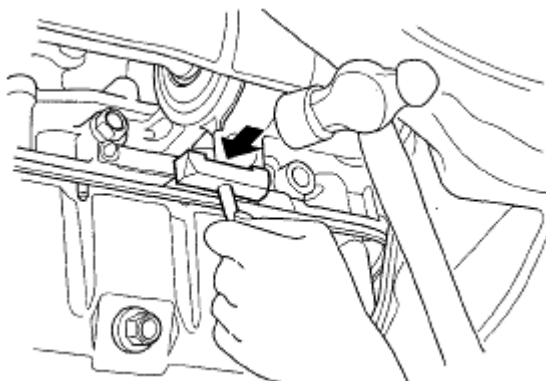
Driving Oil Pan Seal Cutter Between Oil Pan & Engine Block
